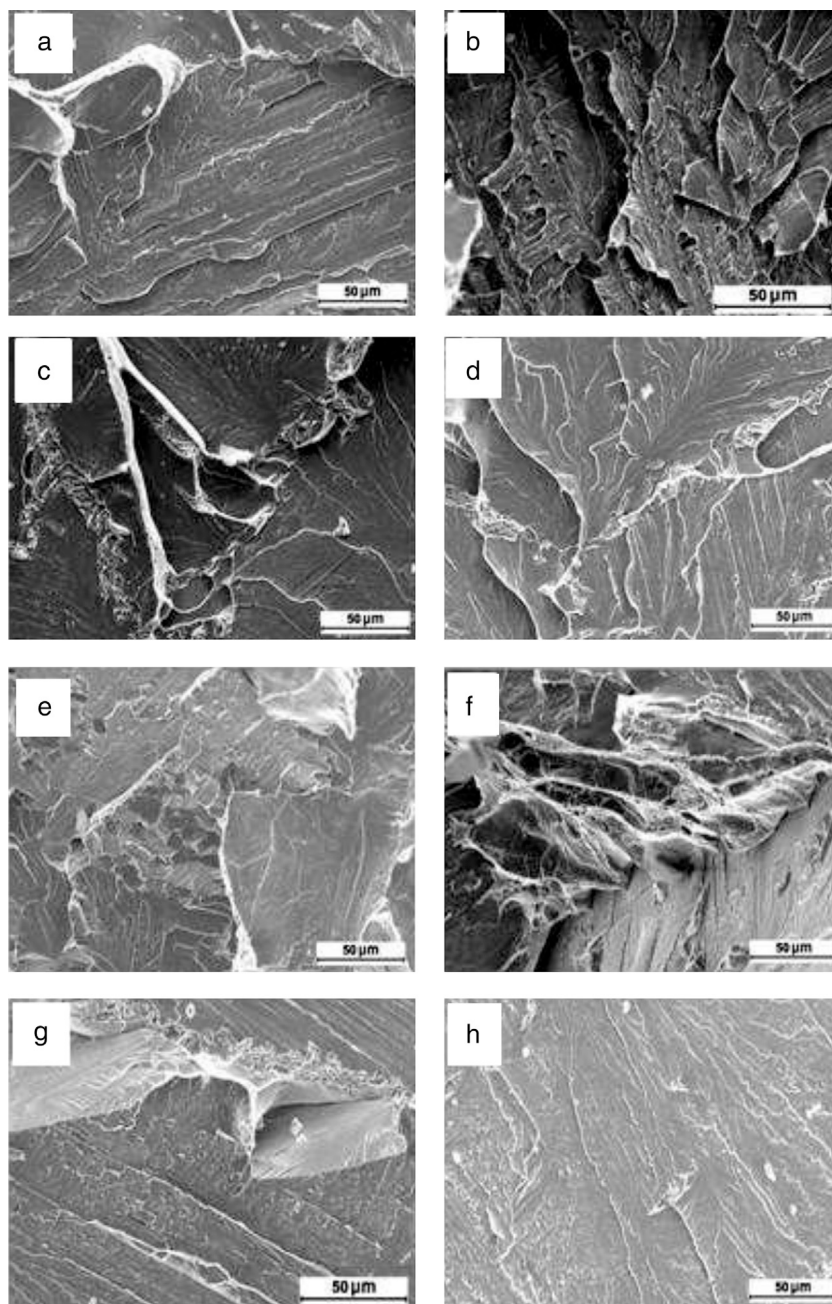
Fractographs of tensile (a–d) and impact specimens (e–h) of ferritic stainless steel weldments in as-welded condition. (a) 1 g Al (1.7 wt.%) addition; (b) 2 g Al (2.4 wt.%) addition; (c) 3 g Al (6.2 wt.%) addition; (d) filler material (ER 430) addition without Cu and Al; (e) 1 g Al (1.7 wt.%) addition; (f) 2 g Al (2.4 wt.%) addition; (g) 3 g Al (6.2 wt.%) addition; and (h) filler material (ER 430) addition without Cu and Al.
